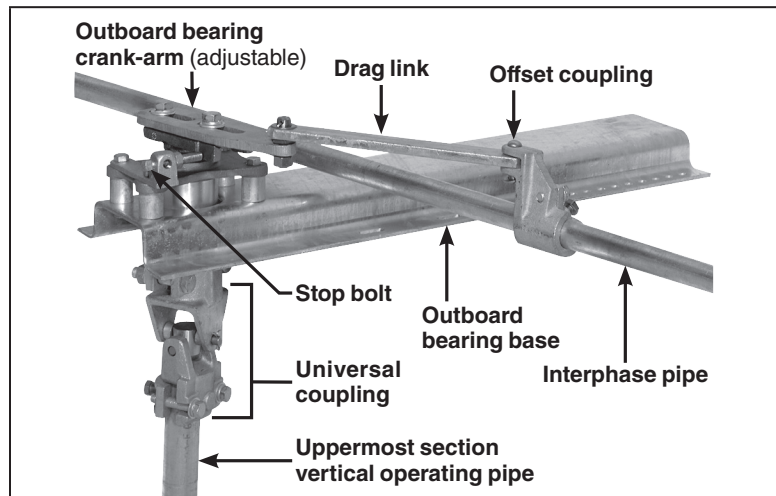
Typical outboard bearing configuration, upright mounted between switch poles, with drag link (flat-bar type).
